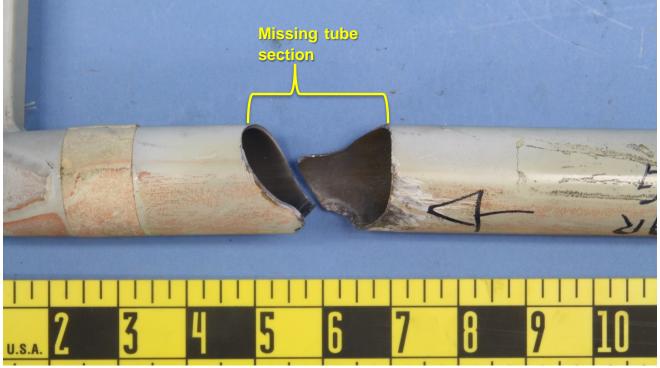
The mating arm fractures, viewed opposite Figure 12 from inside, showing the missing material.
